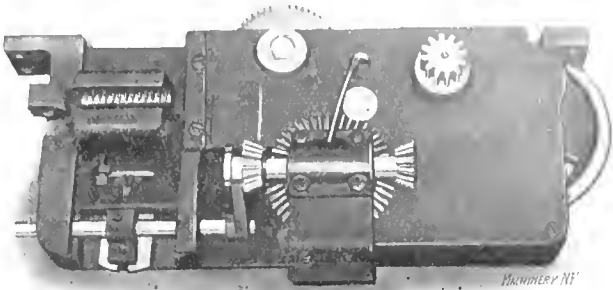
Rear View of Apron of Cincinnati Lathe & Tool Co's 16-inch Engine Lathe
